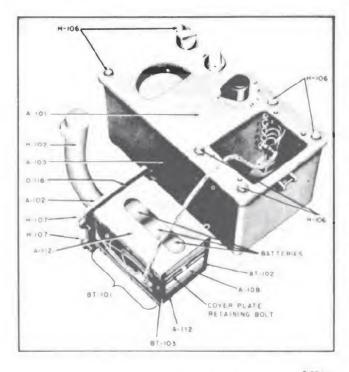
Radiacmeter IM-75/PDR-18, Battery box removed.
